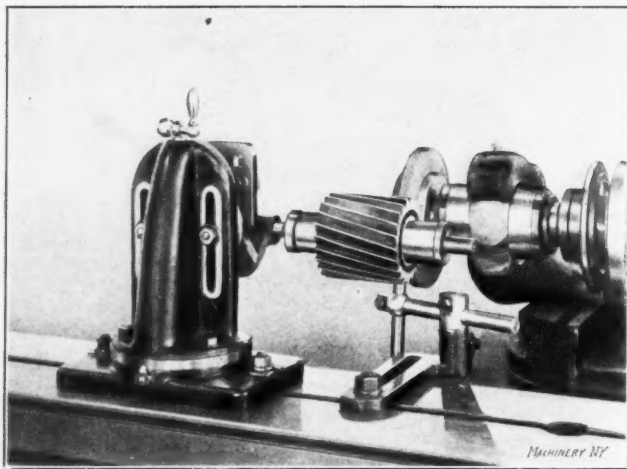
Spiral Milling Cutter being sharpened on Cutter Bar
